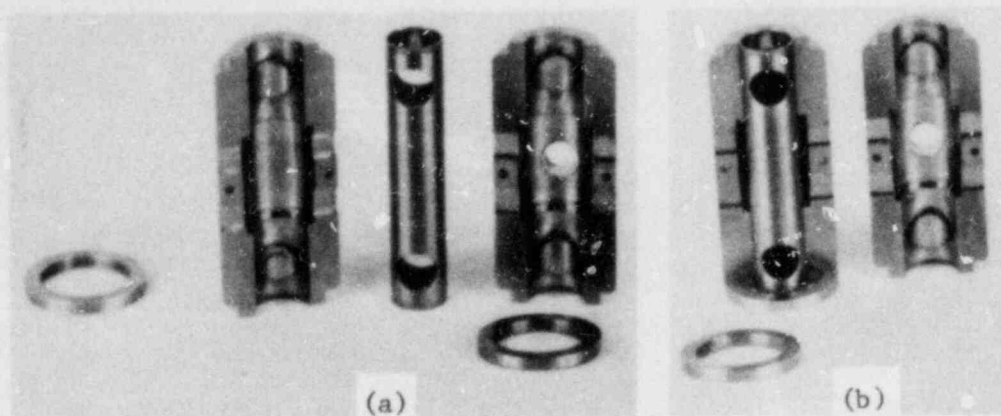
Axial Constraint Fixture and Specimen. (a) Specimen and fixture components and (b) partial assembly.
